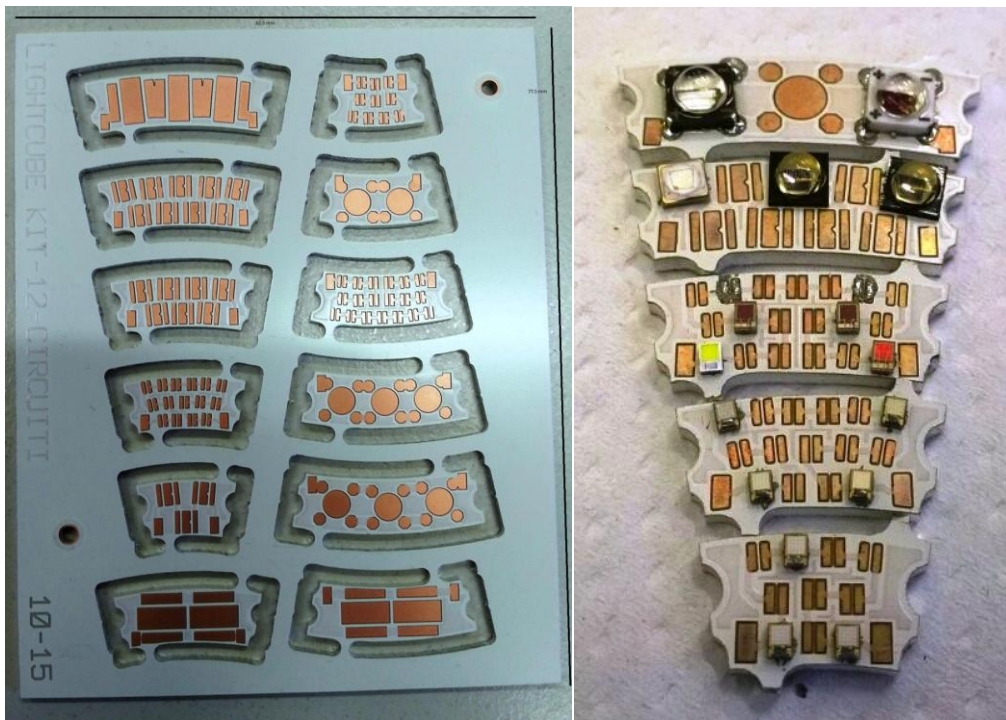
and 7.4: a prototype of the plates and in figure 2.8 can be seen the probe LEDs welded on the first plates
